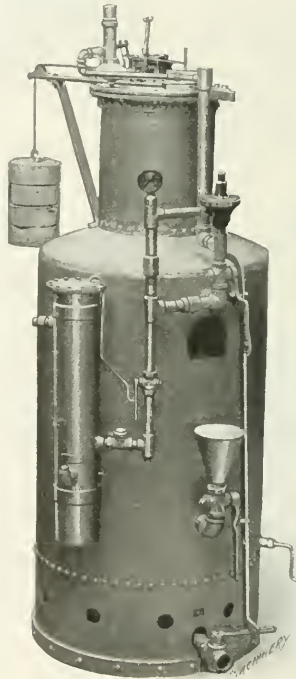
Acetylene Generator built for Use with Milburn Welding and Cutting Torches
